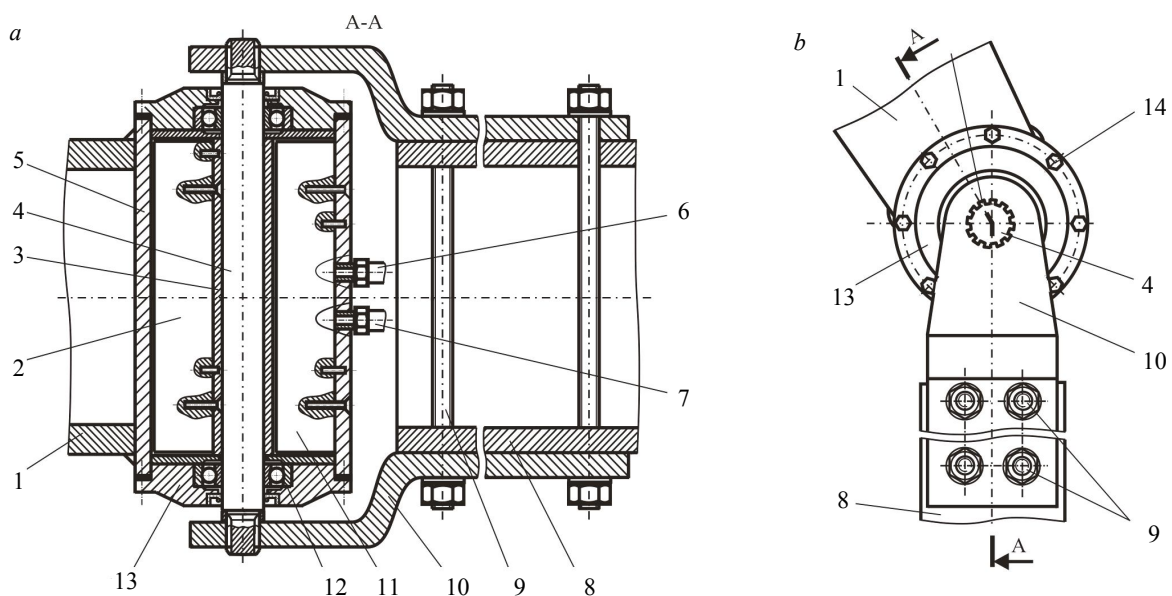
The design of the drive swing connection: a – longitudinal section; b – side view
